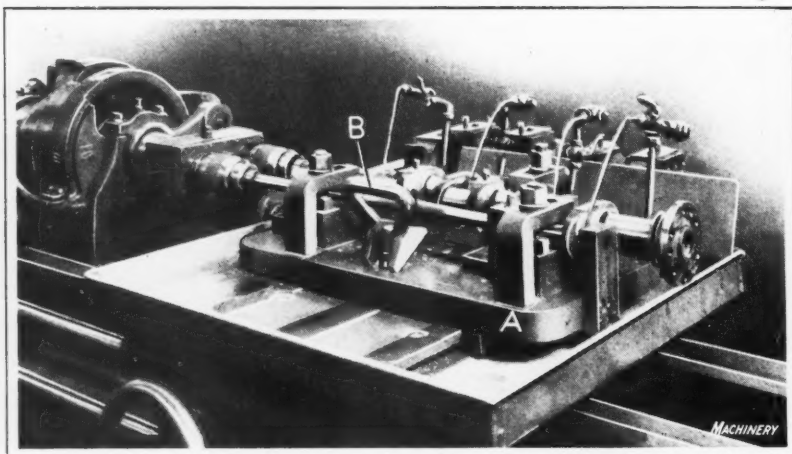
Boring the One-inch Holes in the Crankpins Concentric with the Ground Bearings
